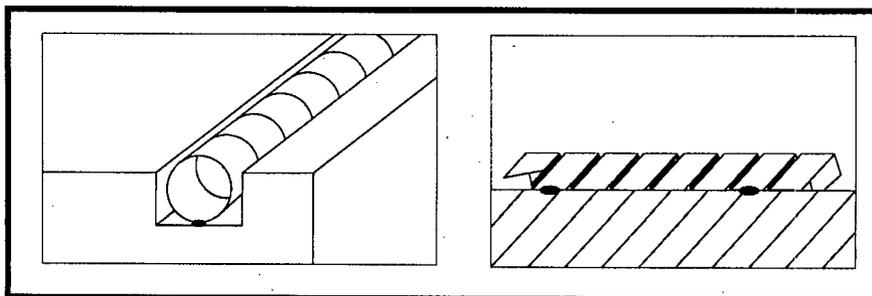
Gasket Held in O-Ring Groove with Adhesive.
